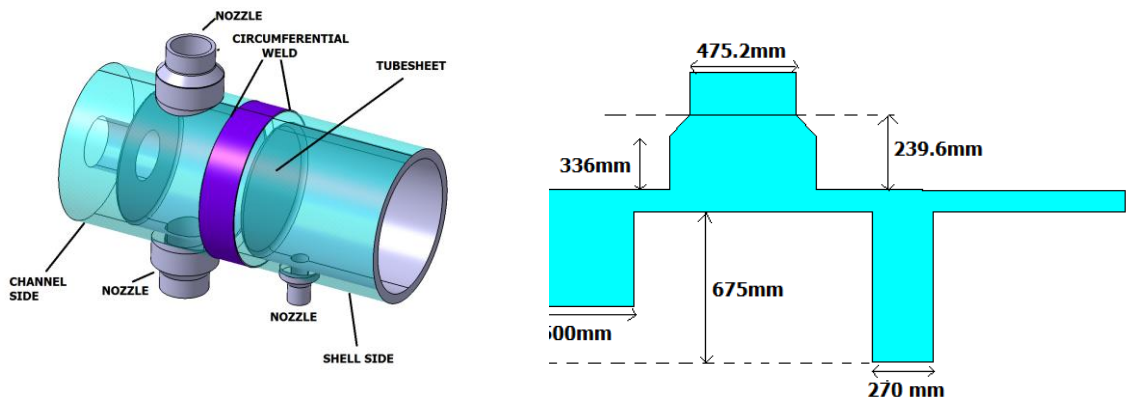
(a) and (b): Model (1) with no additional structures near the weld area (purple area) and its 2D representation
